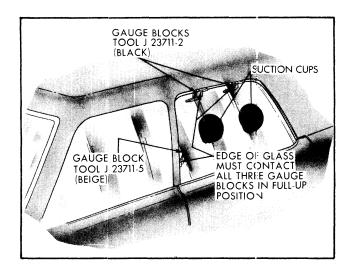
Rear Door Window Alignment (Fore and Aft and Rotated "Cocked" Glass in Body Opening Adjustment)
